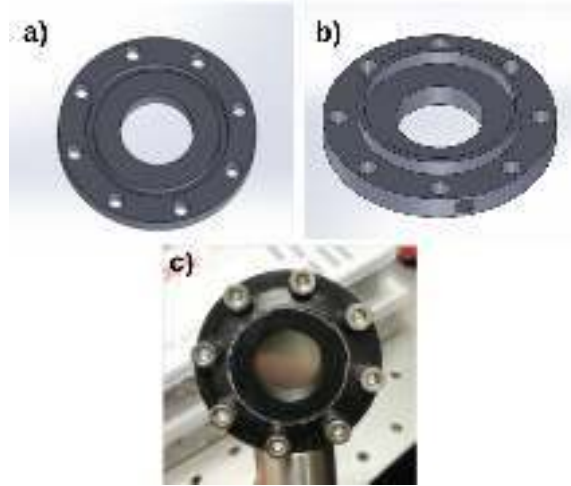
Design of the clamp top a) and bottom b) parts showing the 8 screw holes as well as the supplementary fixing hole to mount the clamp onto a standard optical support. Picture credit, Aditya Sudharsanam. The picture of the 3D printed clamp in c) shows how the clamp is assembled to hold a thin stainless steel sheet.
